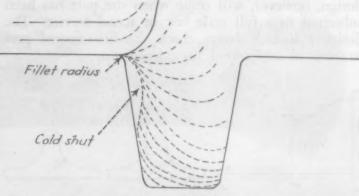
Fillets should be as large as the design permits, since small fillets restrict the flow of metal into the deeper crevices of the die; resulting in forging defects such as cold shuts and causing excessive die wear.
